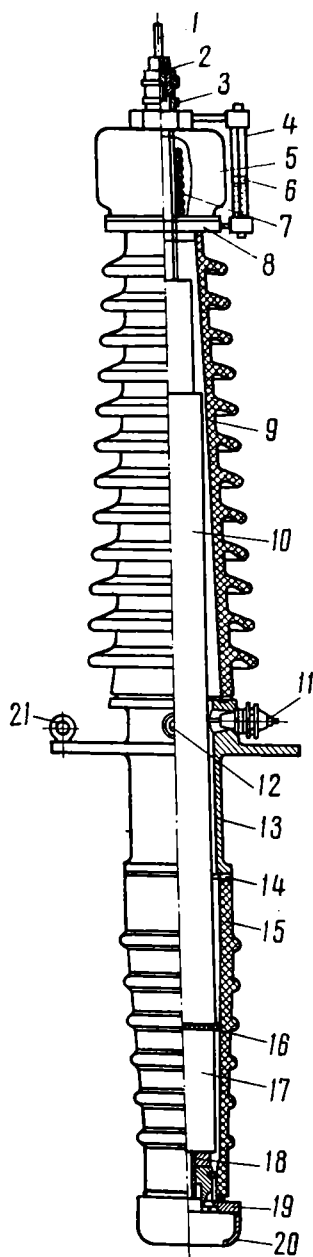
110-kV, 600-A, oil-filled bushing (type MT-110/600)
